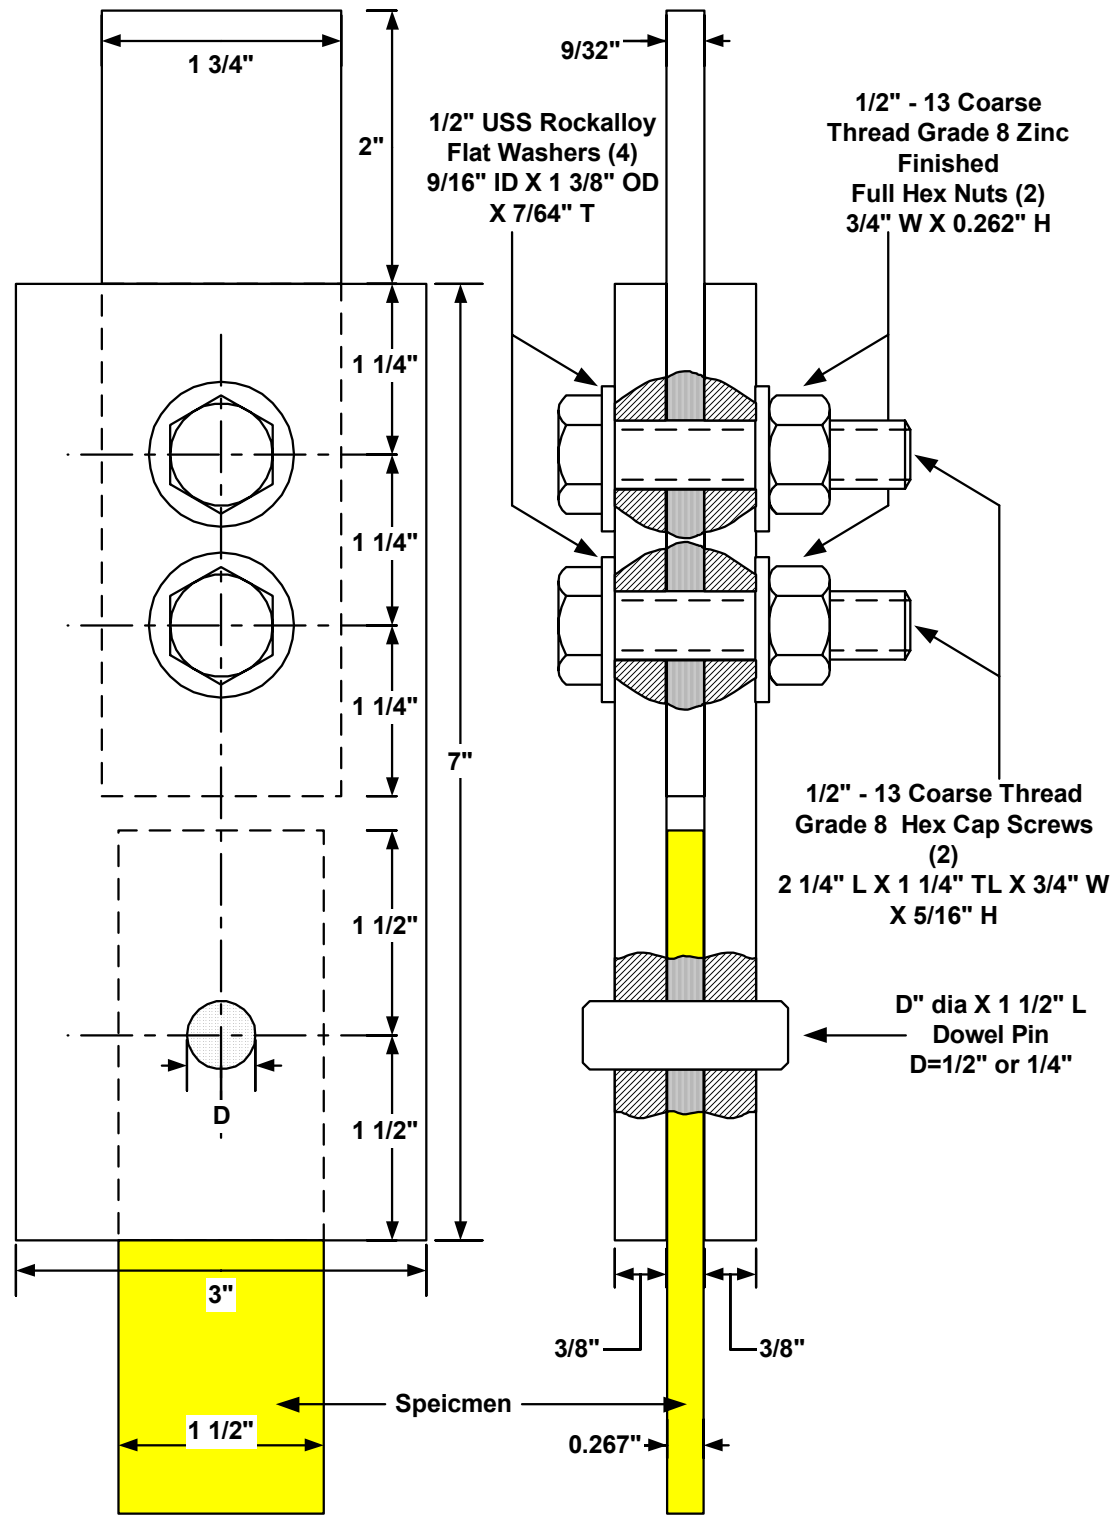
The front and side views of the pin-joint set-up with a composite strip specimen.
